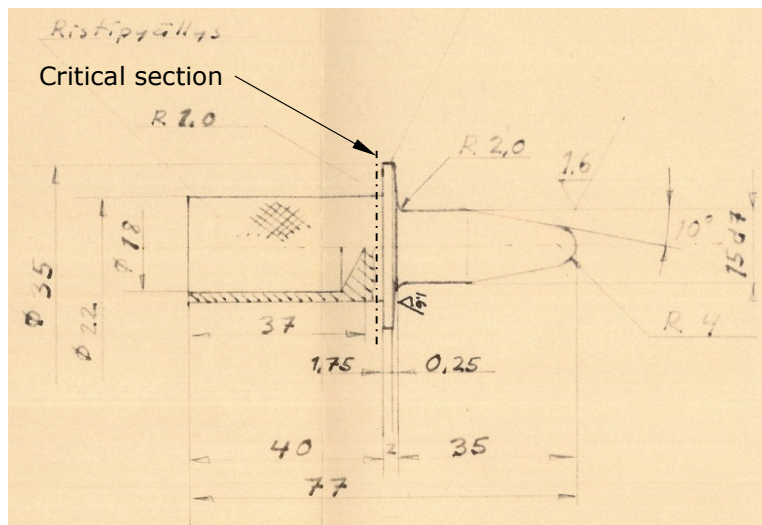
Wing bevel pin, ref. drawing 3-20D-54-301-9 (a).
